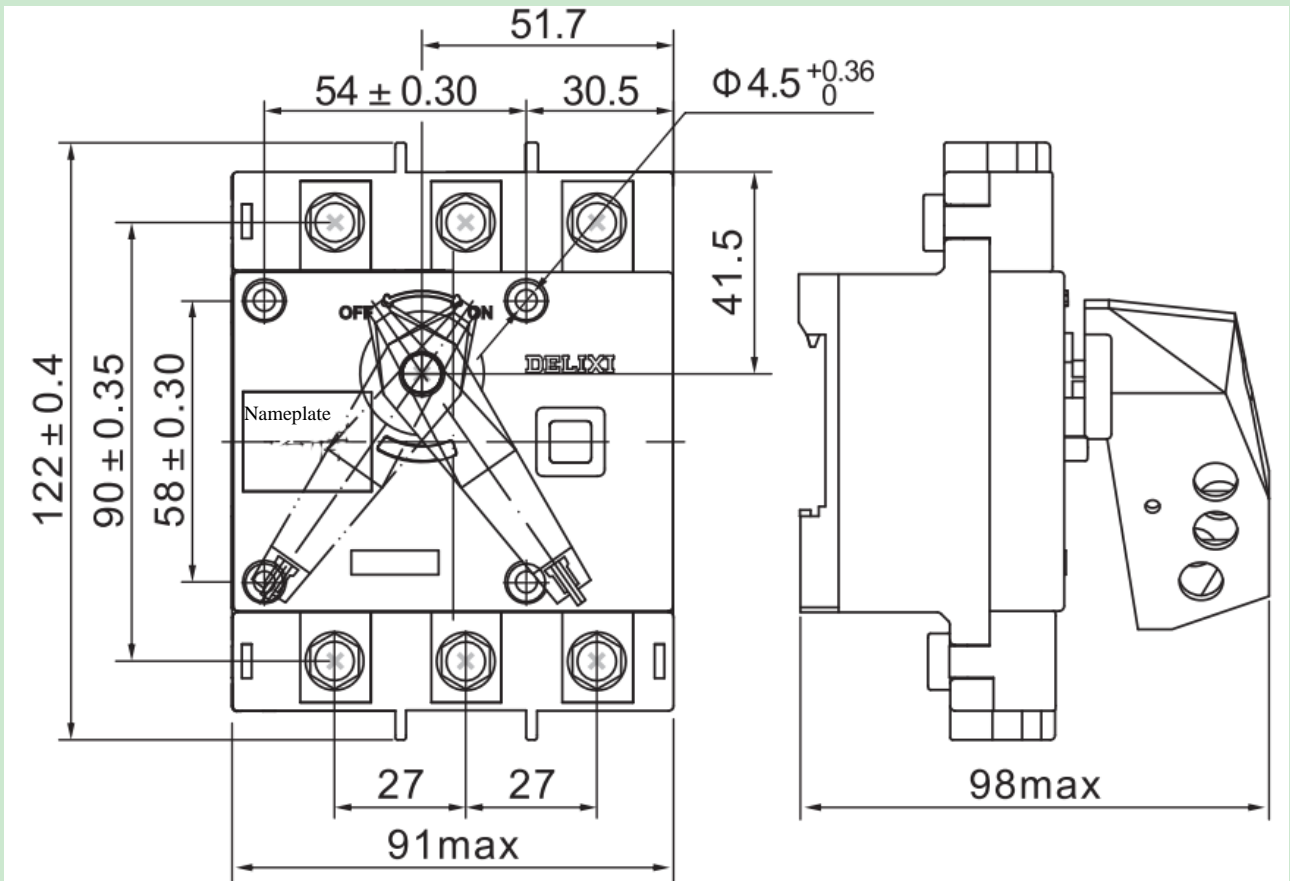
Outline and installation dimensions of HGL and HGLi-80 ~ 100/3 disconnectors
